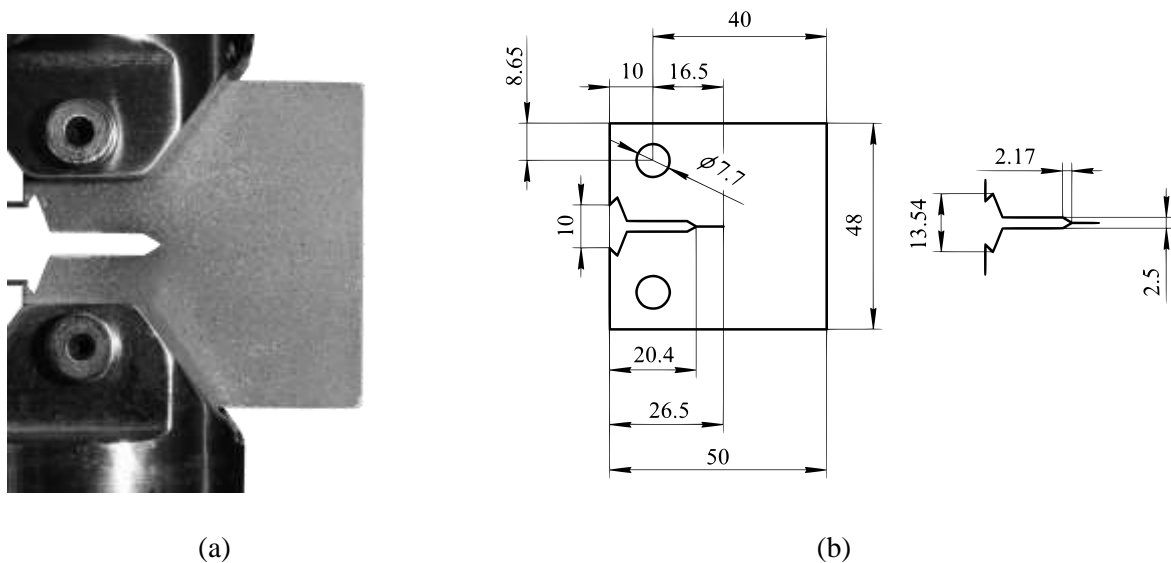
The photography of compact tension specimen (a) in experiment equipment and its drawing (b) with dimensions.
